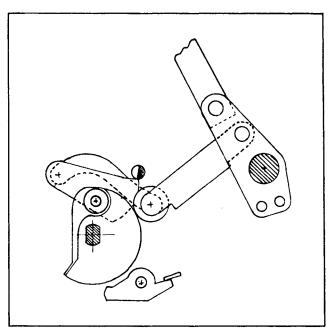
Stored-Energy Mechanism: Breaker Closed, Springs Discharged
